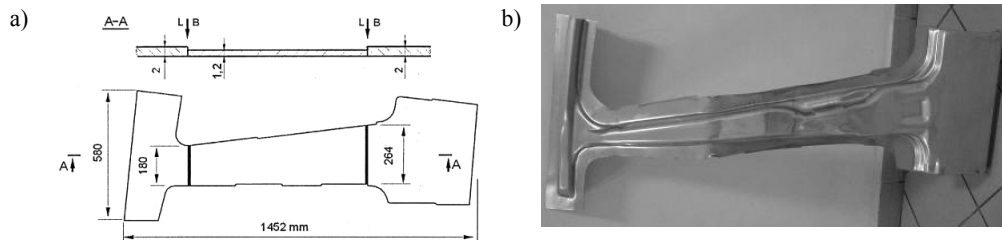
Welded pass of laser-welded tailored blank (a), the tailor welded blanks type A-B execution in stamping process – first operation of b-pillar stamping (b)
